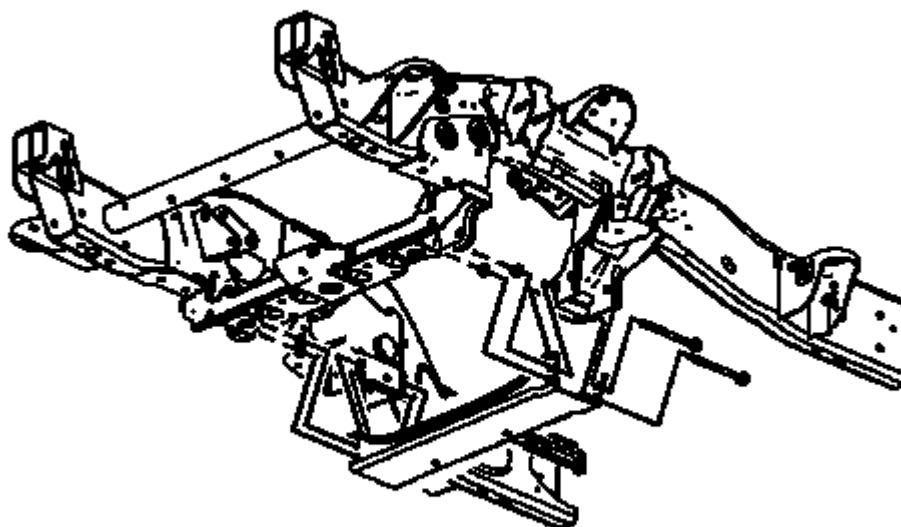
View Of Left Side Transmission Cover Bolt
